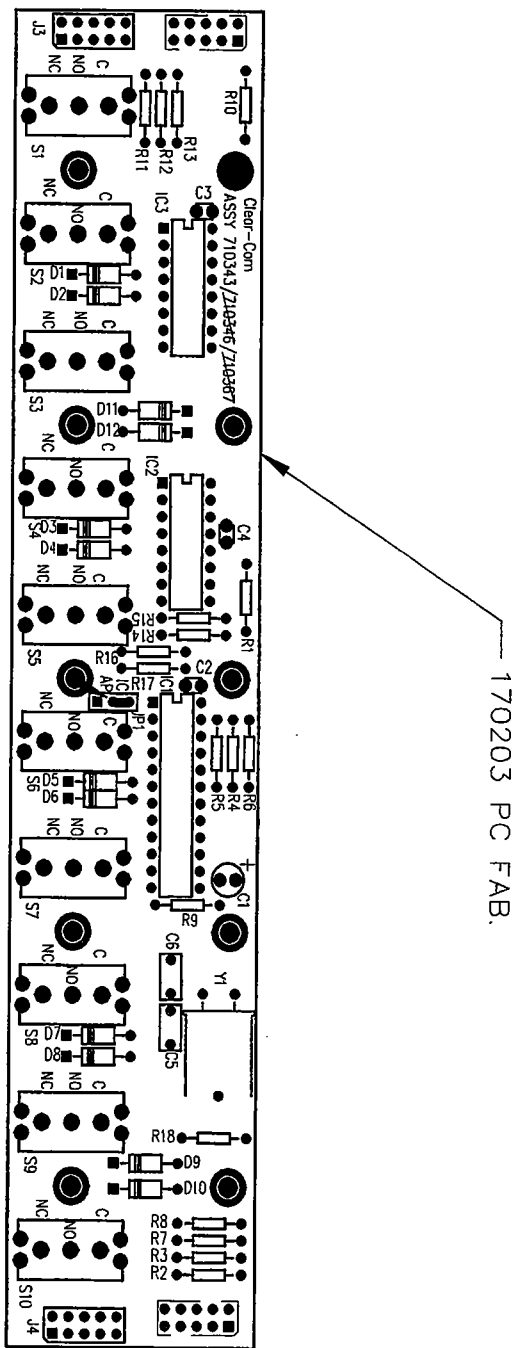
Assembly Drawing—ICS-92/92T Selector Switch PCB Rev. D
